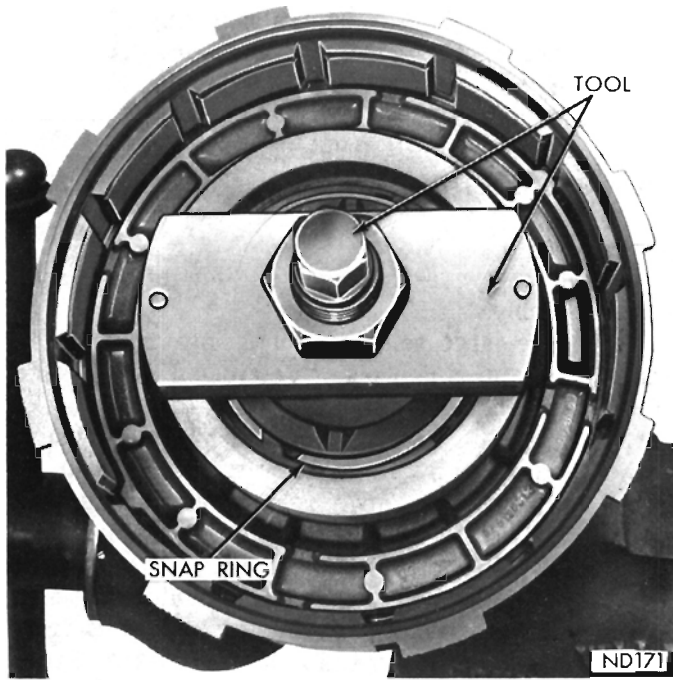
Removing or Installing Front Clutch Retainer Snap Ring (A-727)
